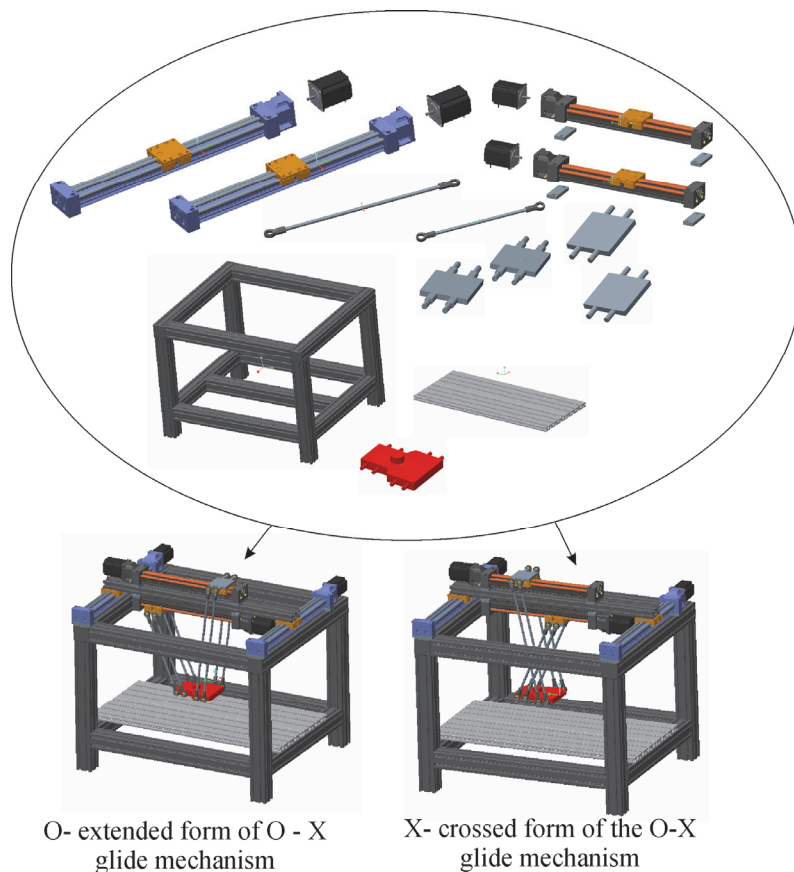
Virtual prototype of extended and crossed form of the O-X glide mechanism
